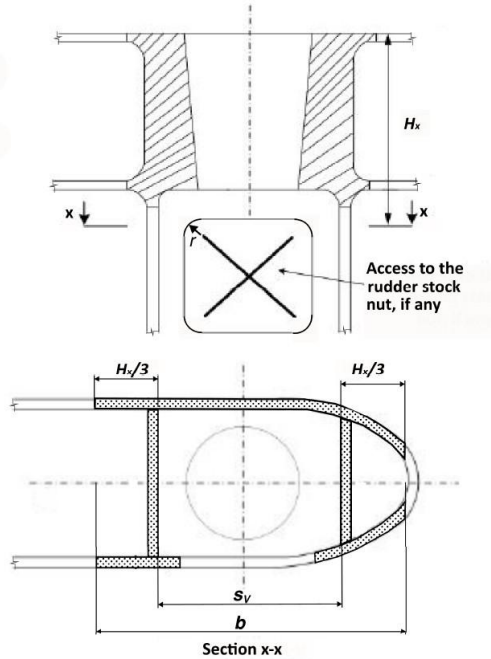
Cross-section of the connection between rudder blade structure and rudder stock housing, example with opening in only one side shown
